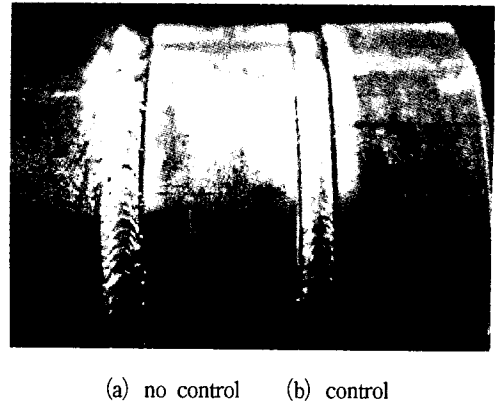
Result of torch position control with arc sensing during fill pass welding
